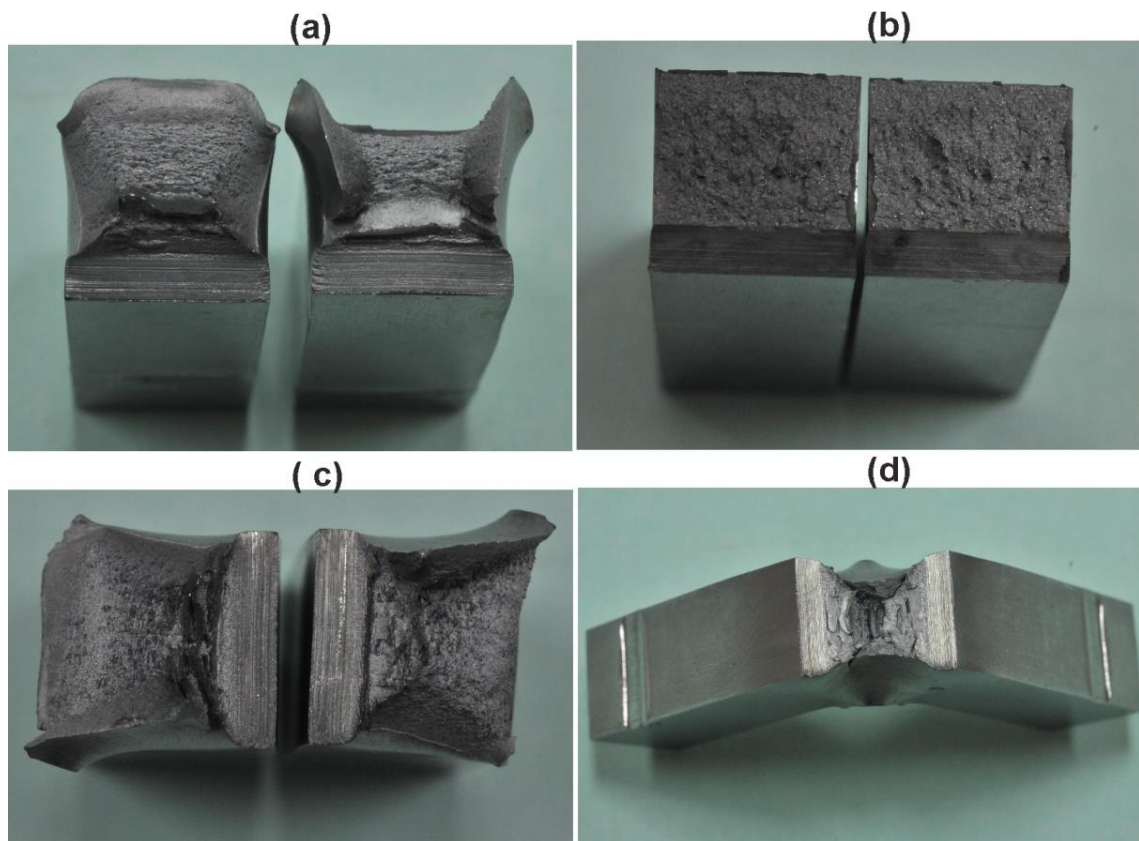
Appearance of Charpy V-notch impact fractured samples illustrating ductile fracture for base metal, PWDT and PWNT conditions (a, c and d) respectively. As welded condition (b) displays cleavage fracture
